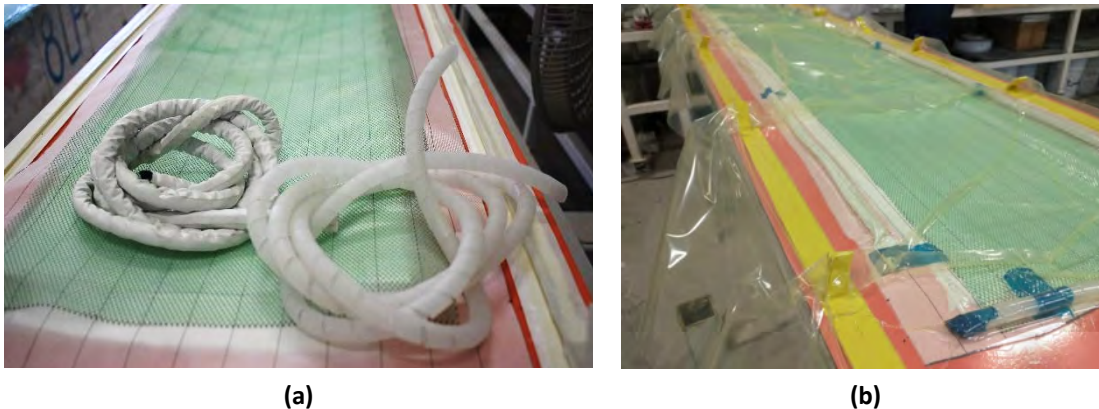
(a) Consumables for the VARTM process, and (b) Vacuum-bag leakage inspection.
